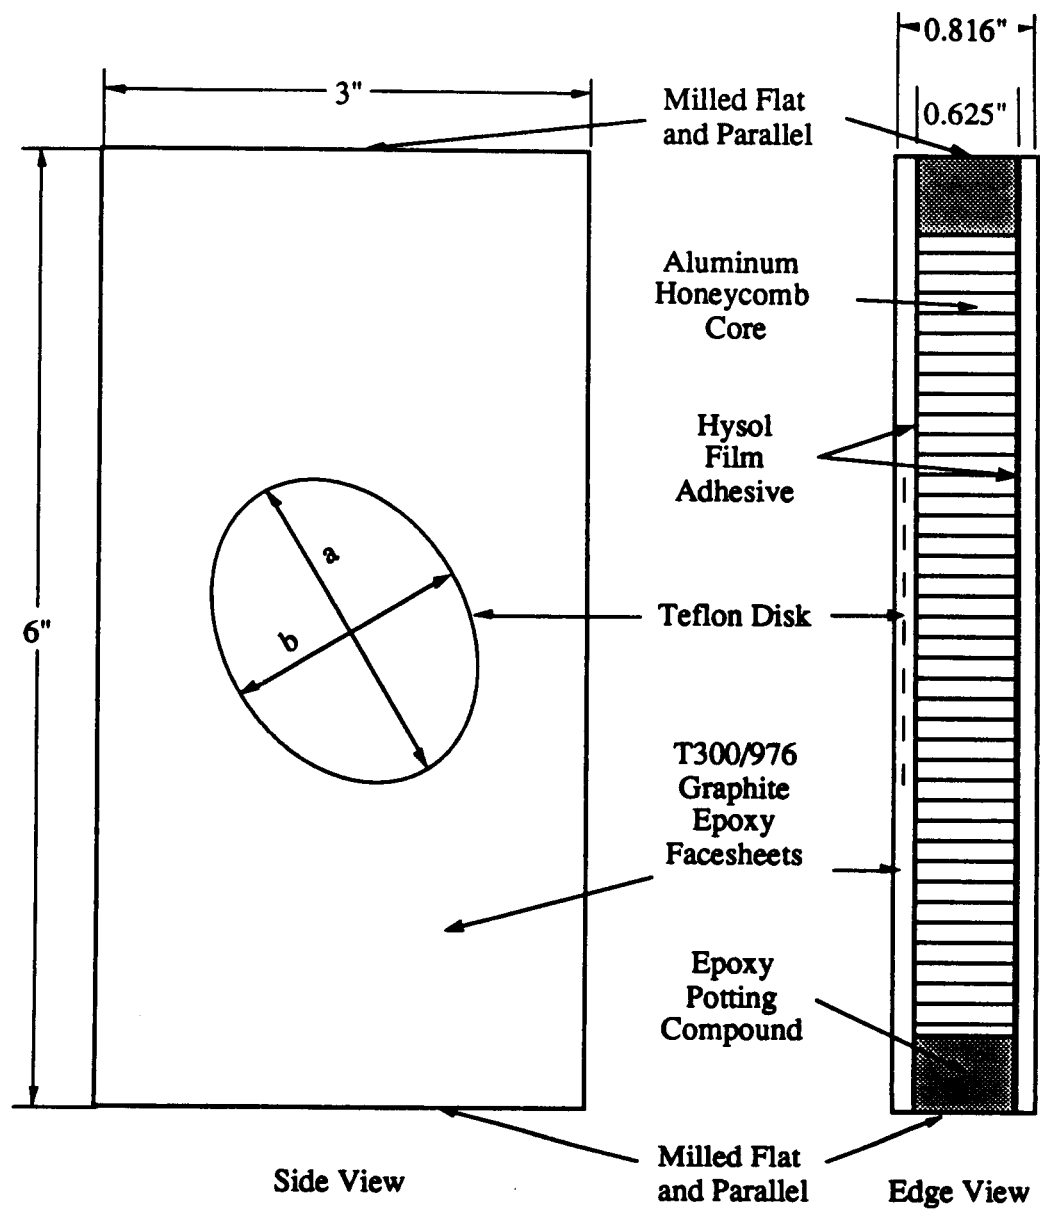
Sandwich construction test specimen containing a teflon disk in one facesheet.
